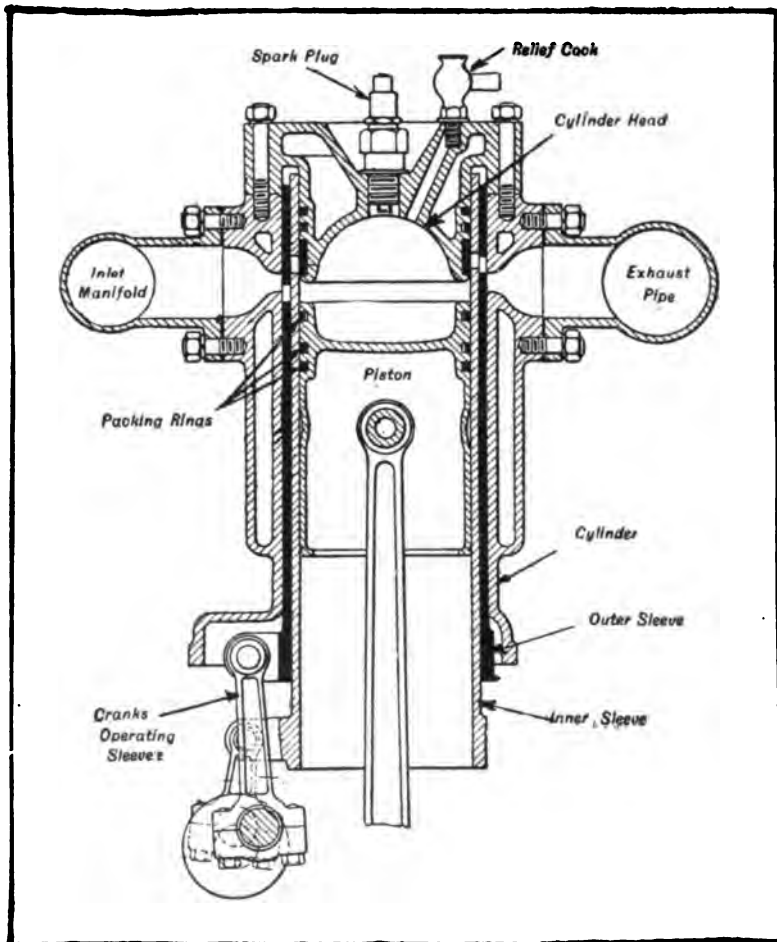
Section through cylinder of Knight motor, showing important parts of valve motion.
